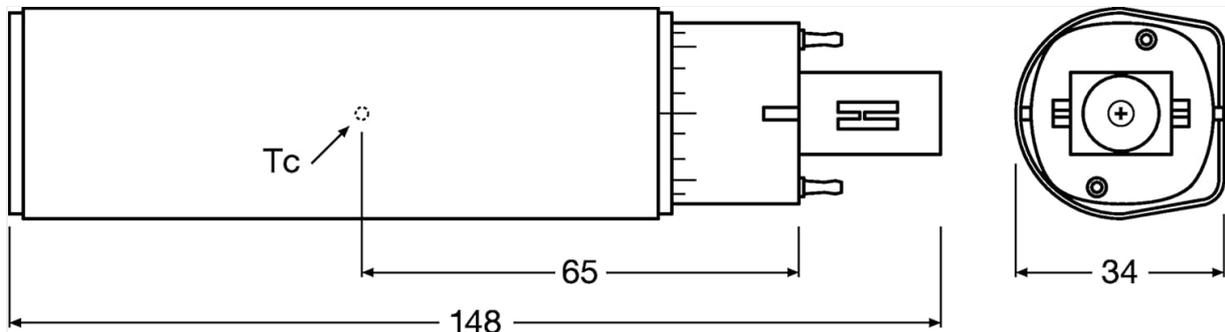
Technical drawing showing the dimensions of the OSRAM DULUX D 18 LED Lamp.
